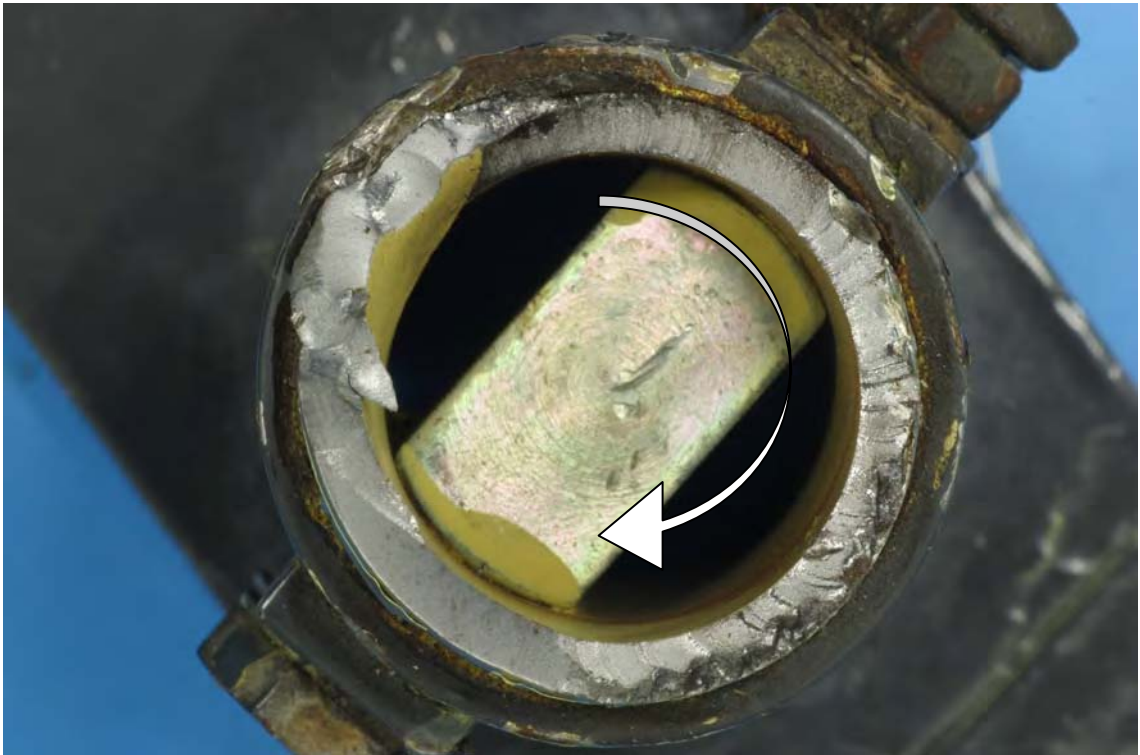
Identifiable crack progression markings (beach marks) on the fracture face indicated the direction of fatigue crack growth (arrow).
